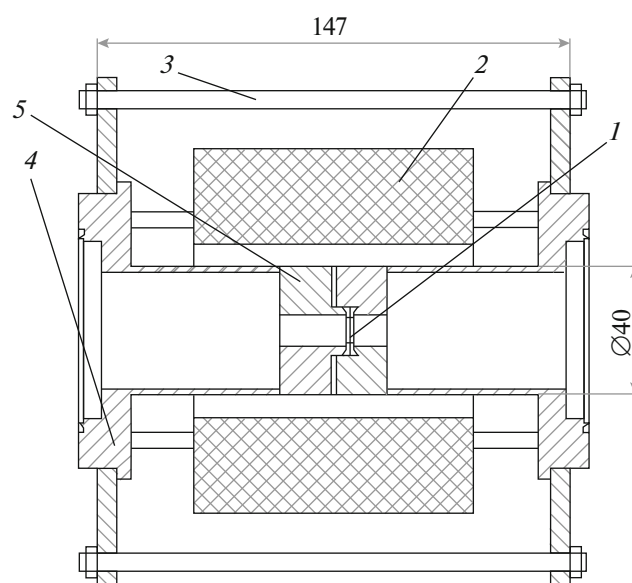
Draft of quick-clamp fixing of membrane samples: (1) sample, (2) external heater, (3) threaded rods, (4) flanges, and (5) diffusion cell.
